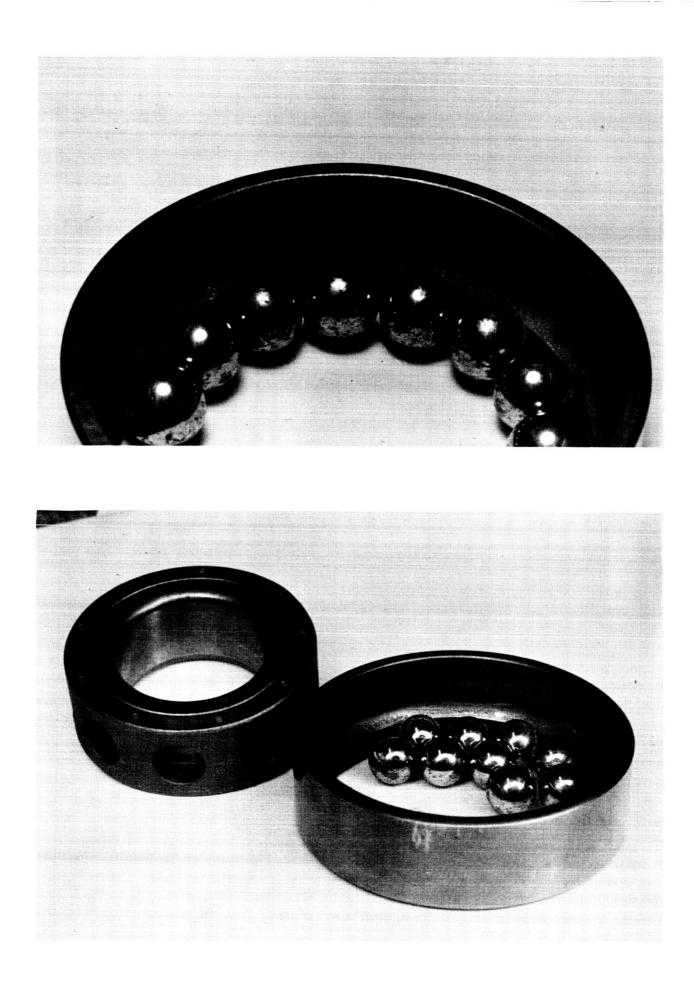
Disassembled Bearing with Tool Steel Retainer. Lubricant - Sodium Silicate-Bonded MoS<sub>2</sub>-Graphite Film
